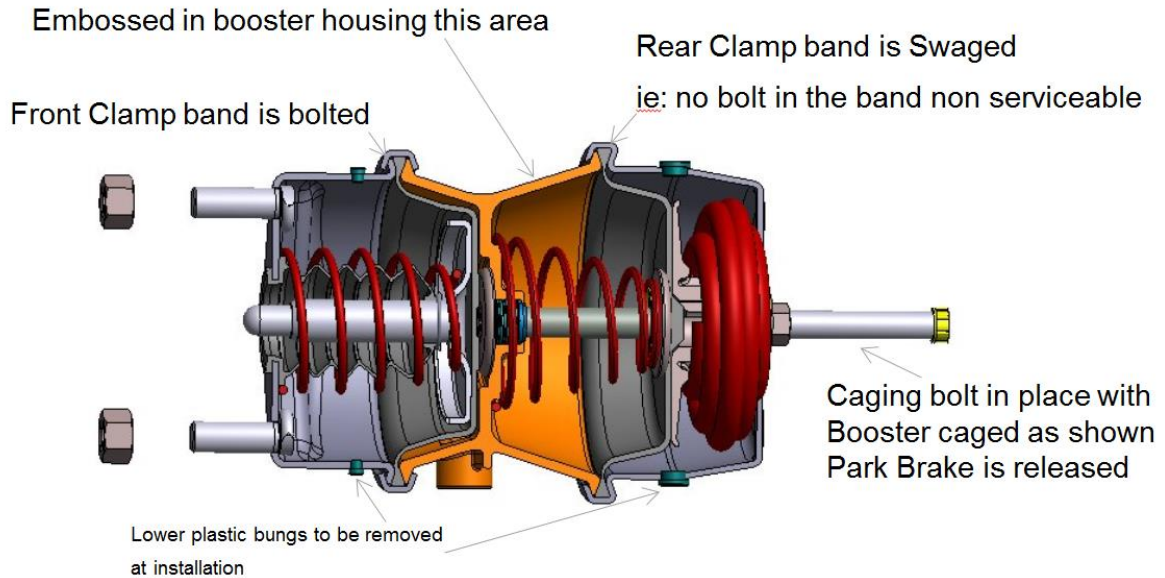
Sectioned chamber with the spring brake chamber element compressed, used in drum brakes. Source Bendix.
